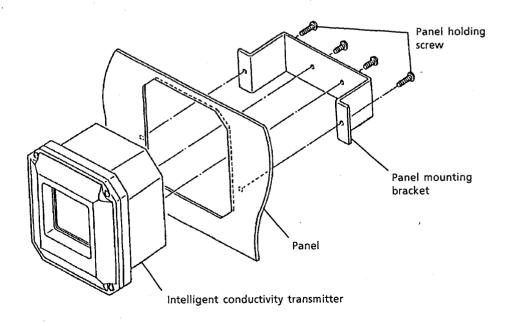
Panel Mounting Bracket and Mounting Procedure
